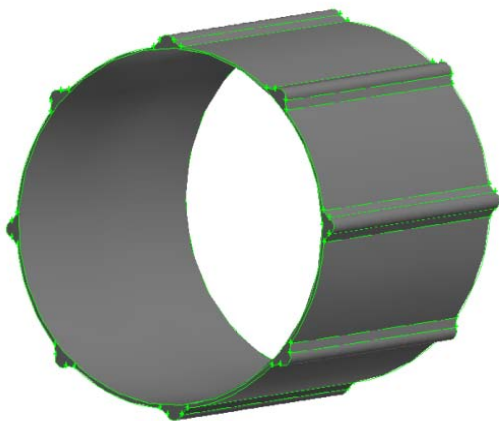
Model of the clearance volume showing 8 axial groove bearing
